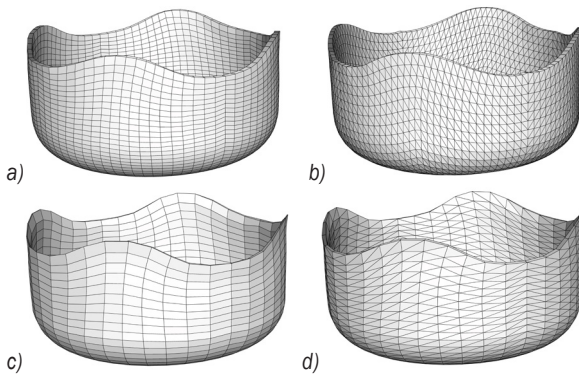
Final deformed shape for a completely drawn cylindrical cup using a) the SHB8PS elements; b) the SHB6 elements; c) the SHB20 elements; and d) the SHB15 elements
